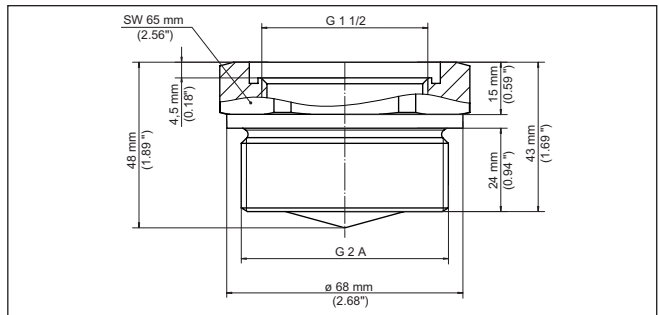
Dimensions of threaded adapter G1½ (DIN 3852-X) on thread G2 (DIN 3852-X)
